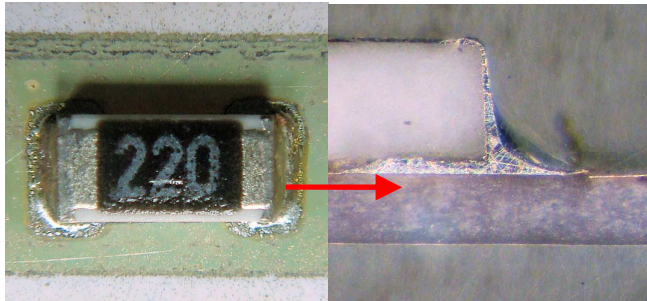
Resistor type 1206 reflow soldered on photo paper with inkjet printed silver metallization, top view (left) and microsection
